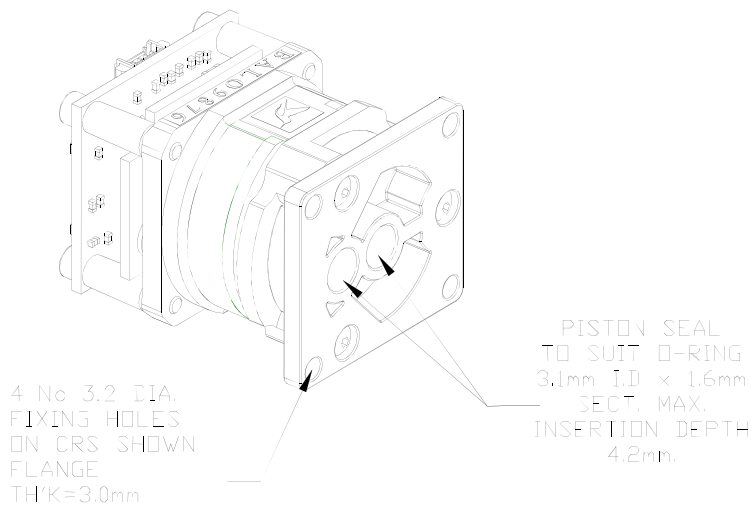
Flange mounted – gas connection via OEM supplied gas ports
